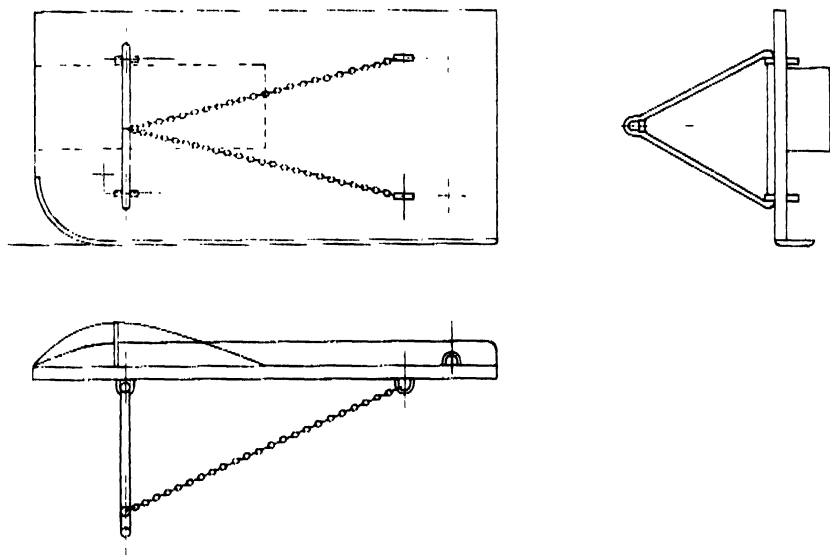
Special ski on the rear side of a rectangular flat otter board to facilitate uprighting.
